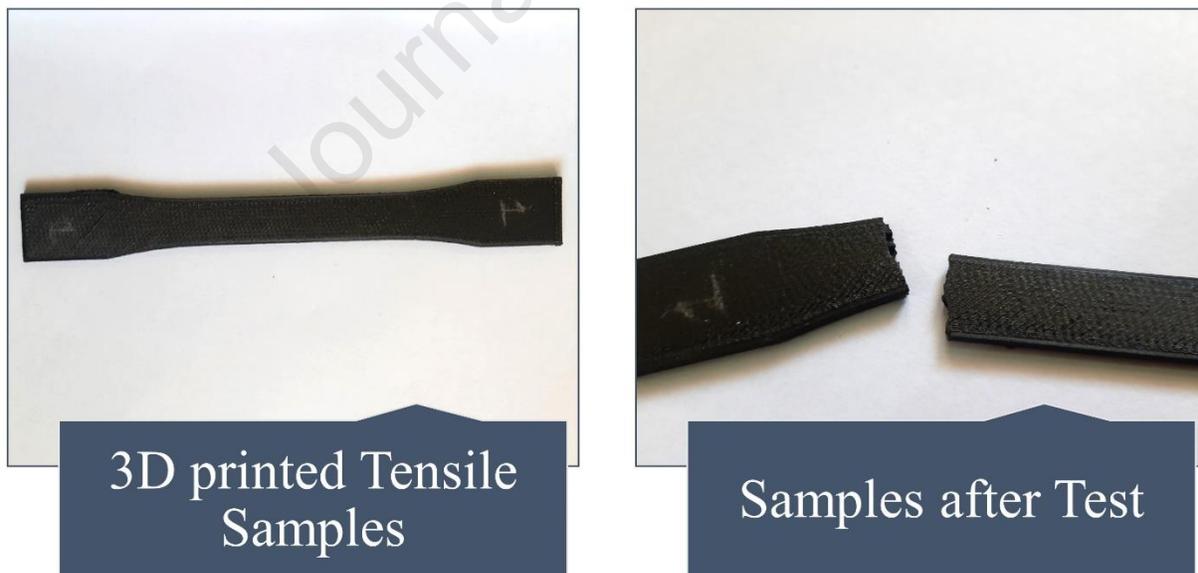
A typical tensile test specimen of a 3D printed part (before and after the test)
